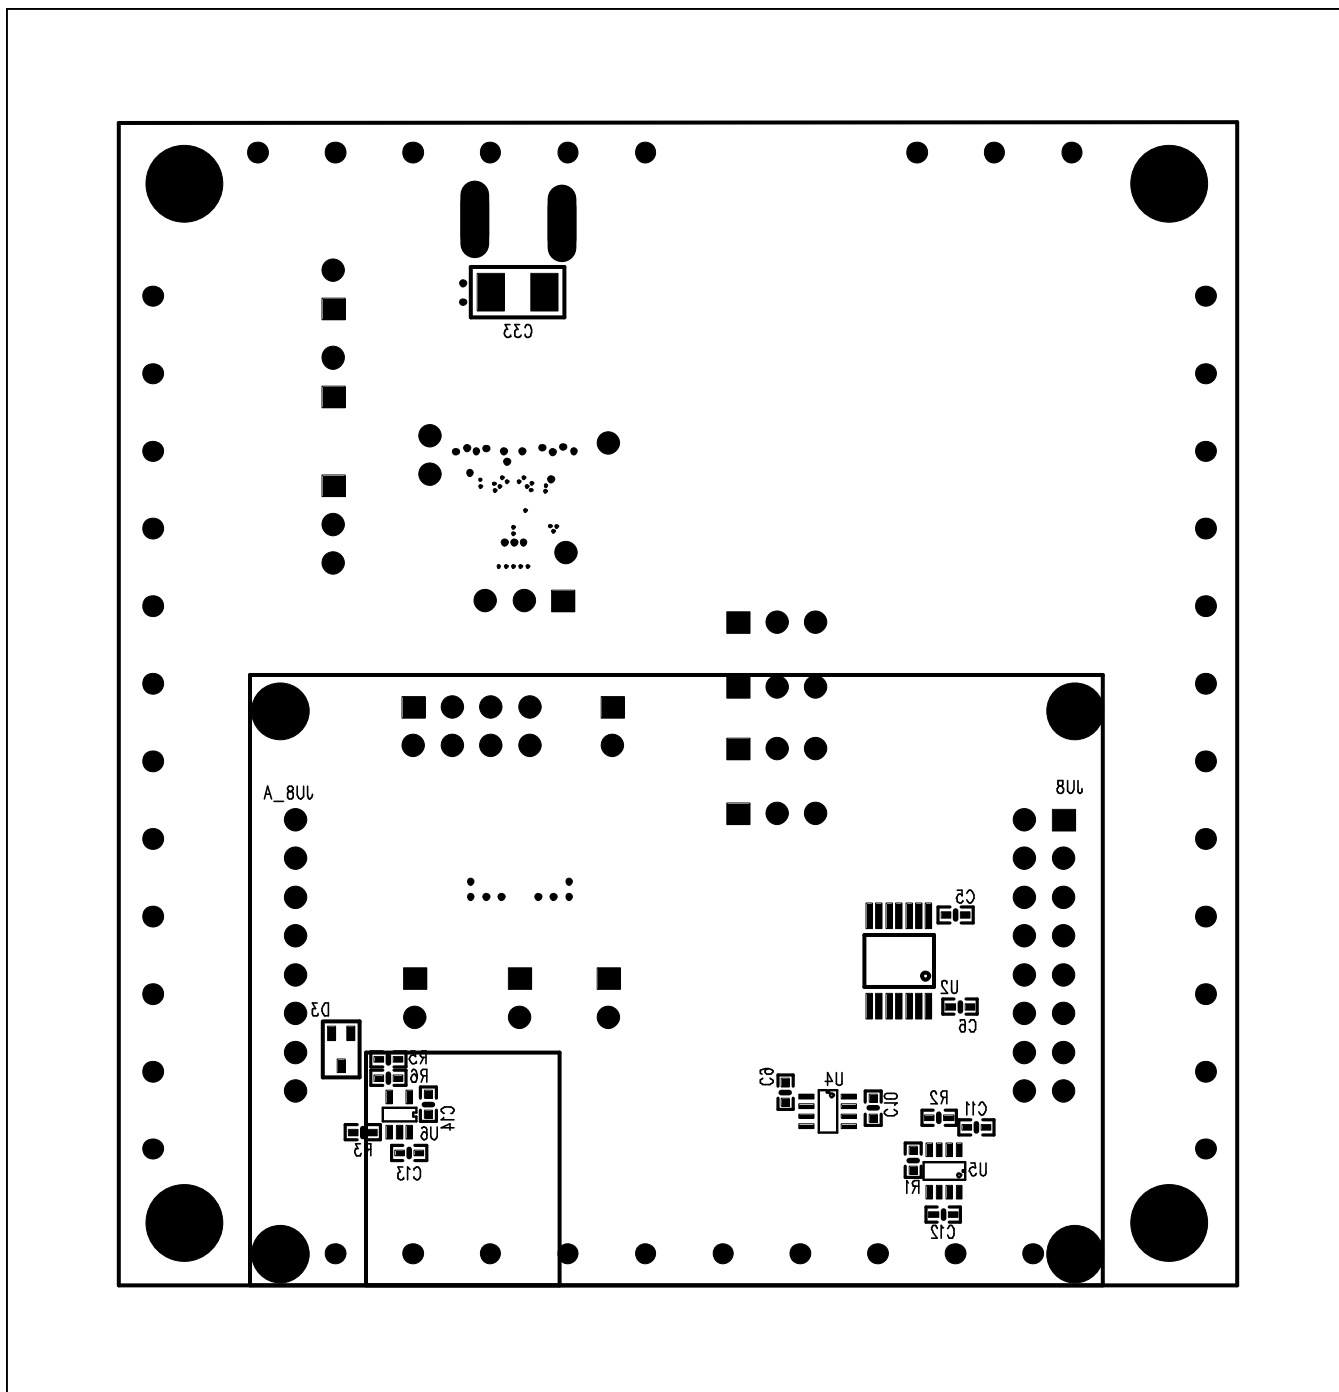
MAX77387 EV Kit Component Placement Guide—Bottom Layer
